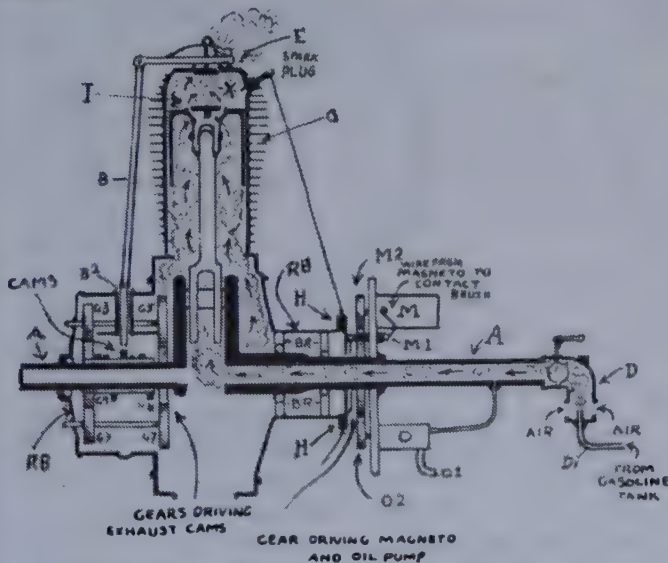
Showing Carburetor Intake through Crank Shaft.
